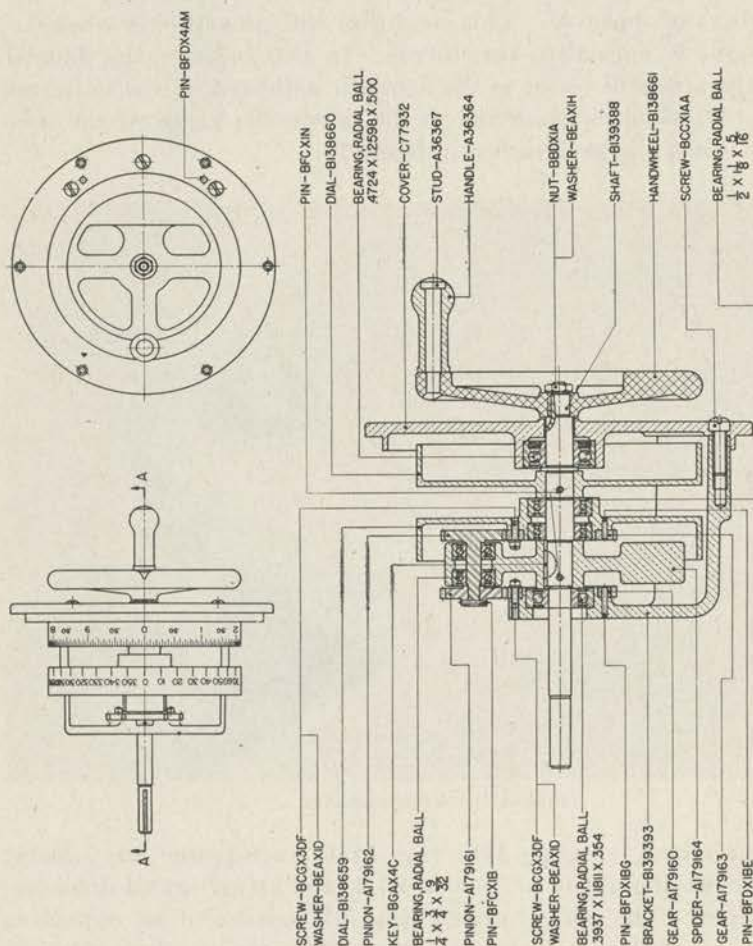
Indicator assembly, counter and handwheel drive.
